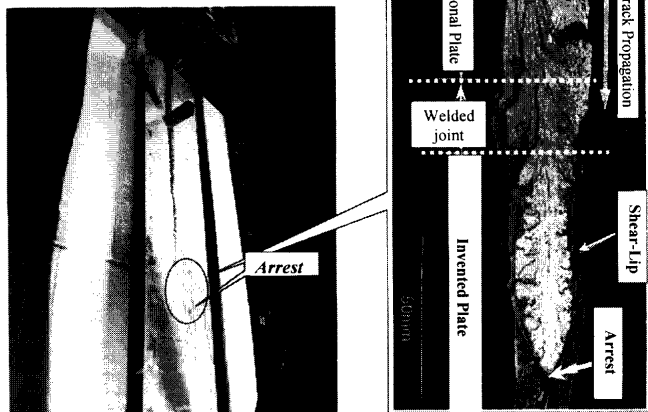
Feature of ultra-wide plate duplex type ESSO test for the SUF steel plate and fracture surface of a test piece.
